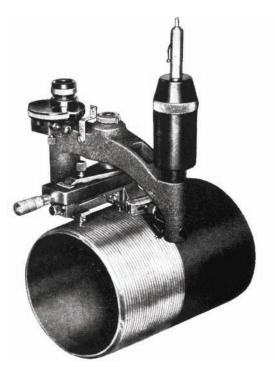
Typical Thread-Contour Microscope for Measuring Thread Angle and Checking Thread Form
